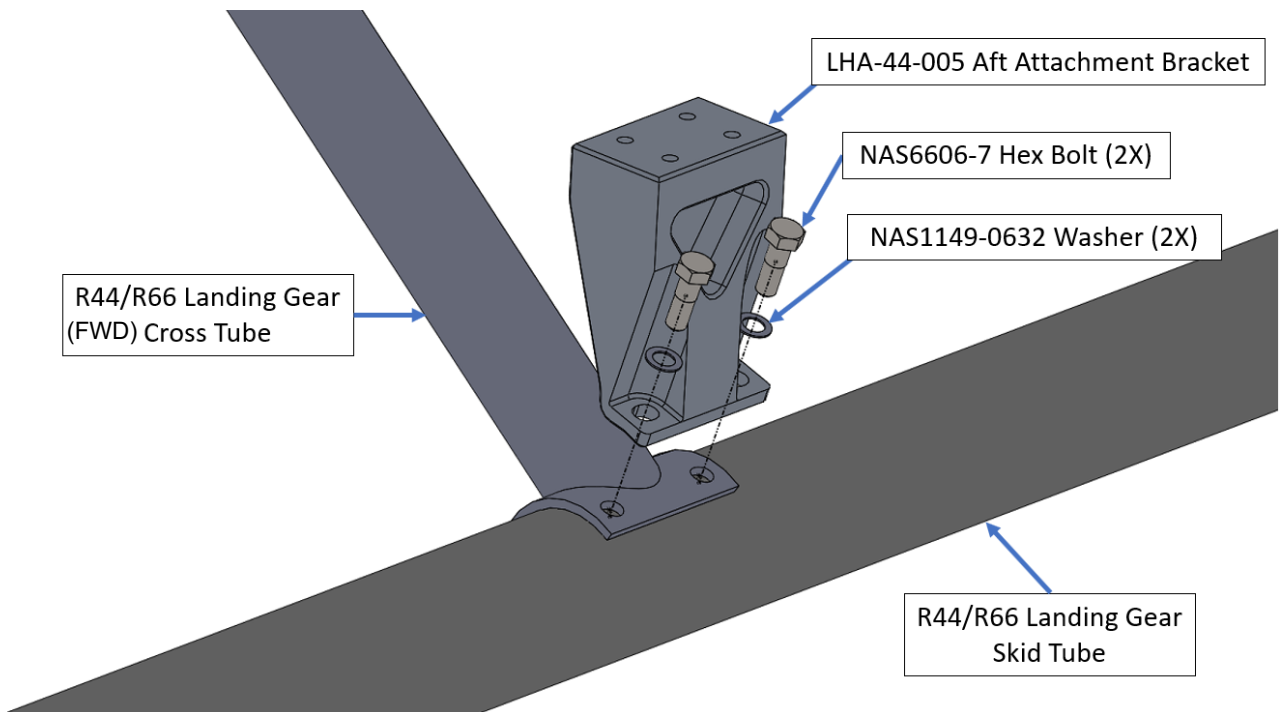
Installation of the LHA-44-005 Aft Attachment Bracket onto the R44/R66 Landing Gear
